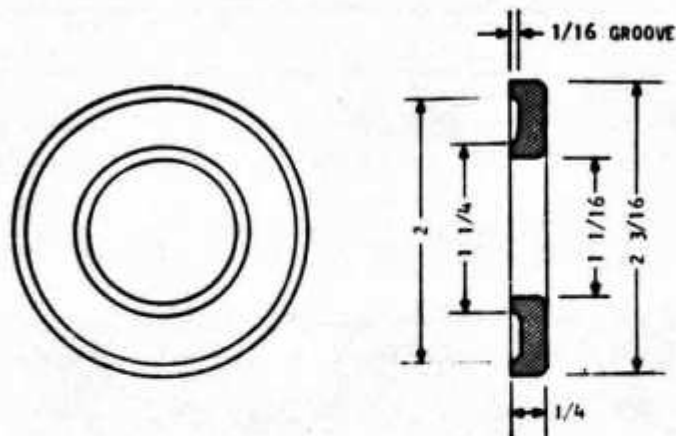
Drawing showing dimensions of end-spacers used on both the medium and high power toroidal tank coils. Polystyrene, 1/4 inch thick is used to make the end-spacers by means of a chassis fly-cutter mounted in a drill press. Wire tension and friction hold the end-spacers in place.
